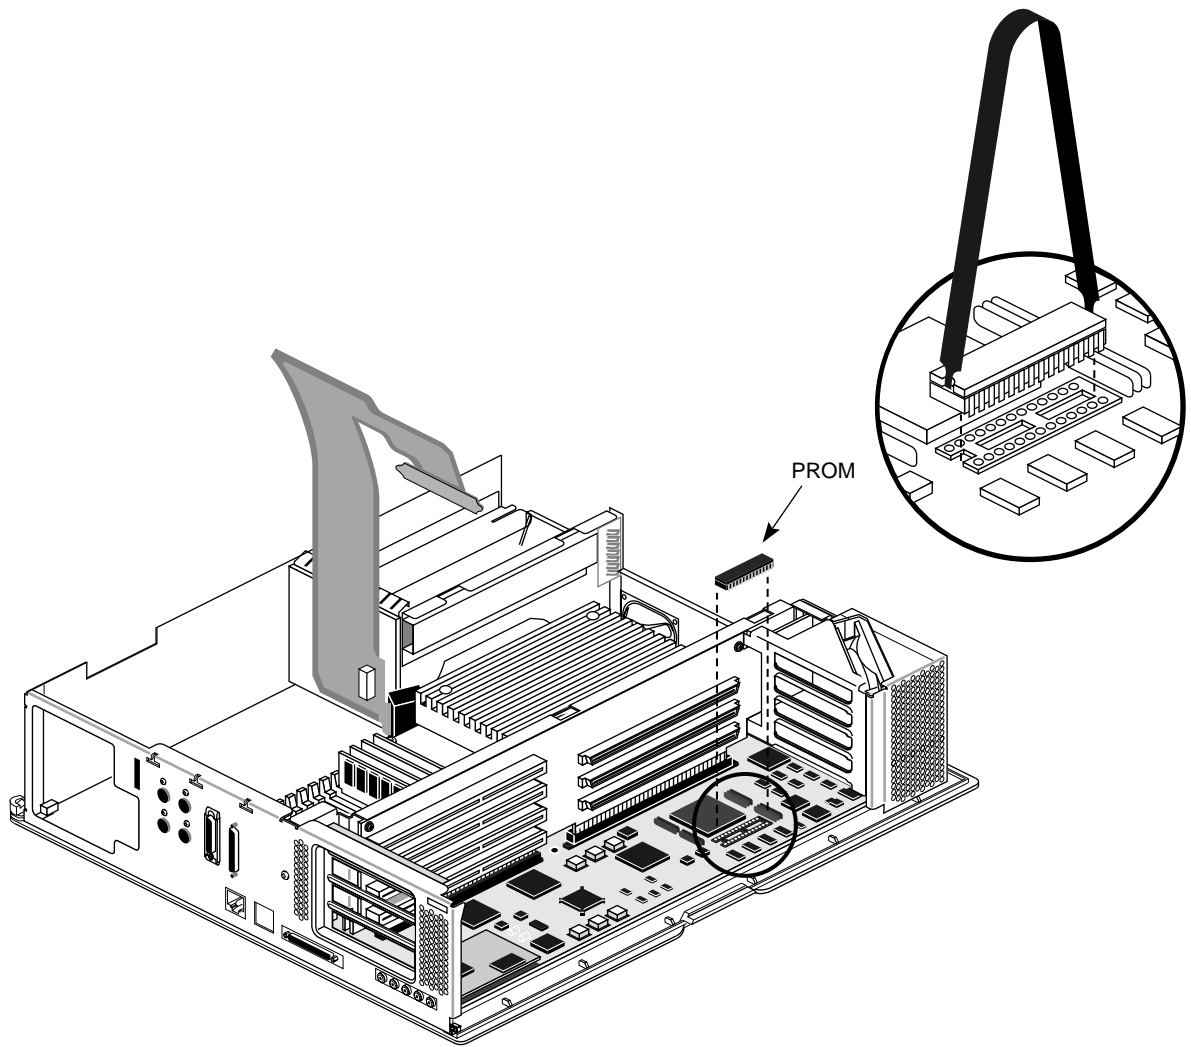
Locating and Extracting the Old PROM From the Motherboard
